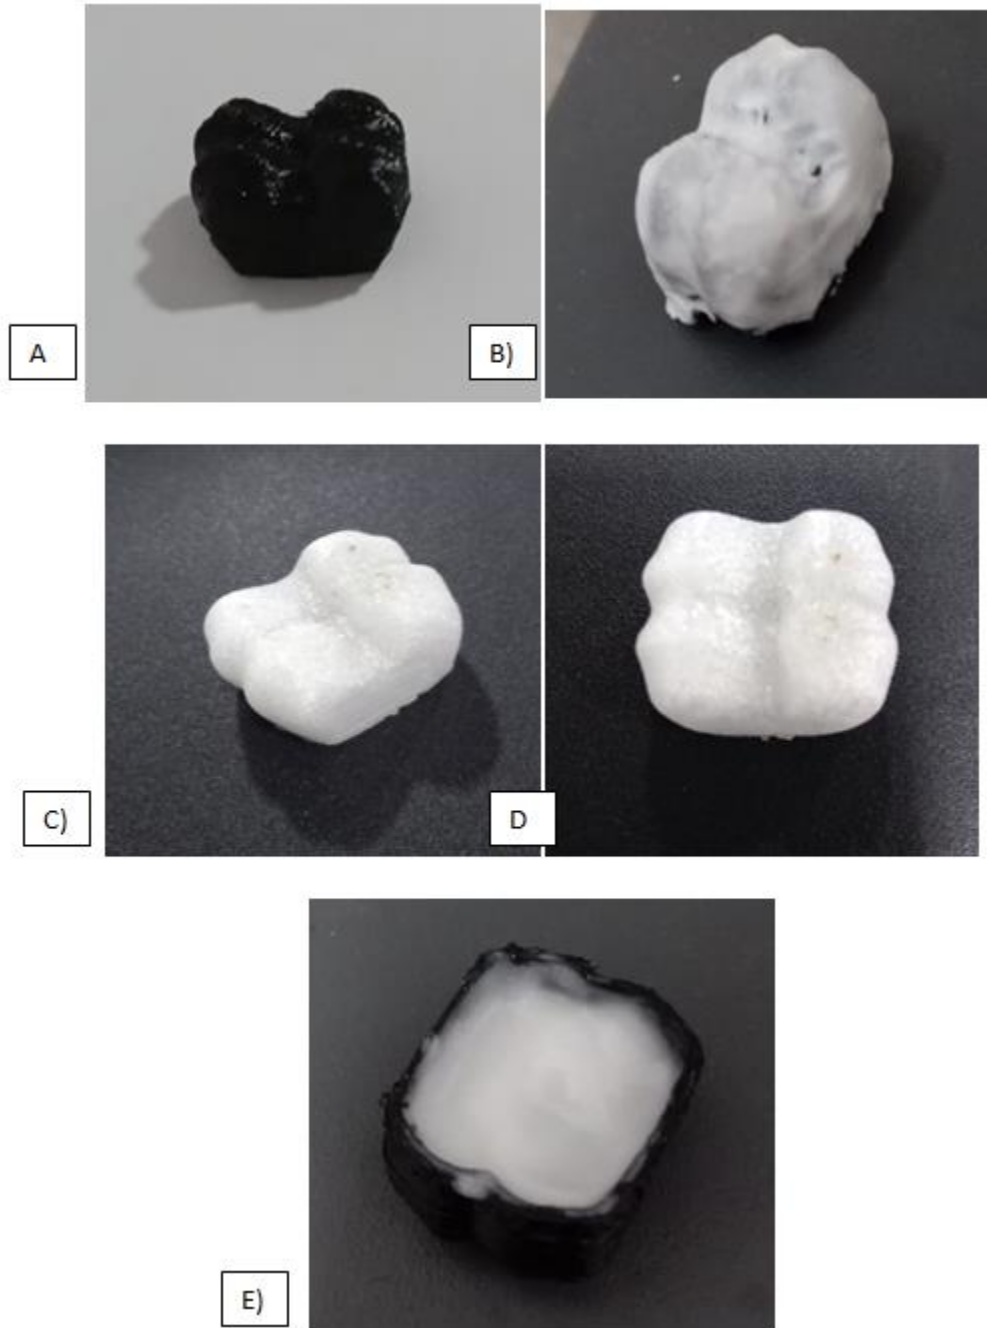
A) 3D printed tooth cap model using PETG, B) coated(A), C) and D) 3D printed tooth cap model using PCTG, E) filled tooth cap.
